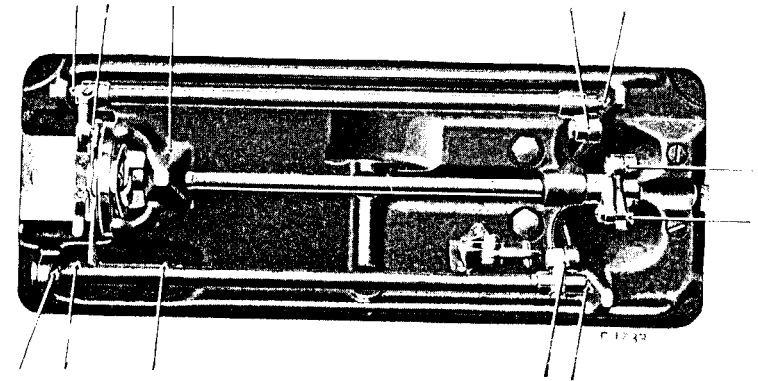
BASE OF THE MACHINE, SHOWING OILING POINTS
